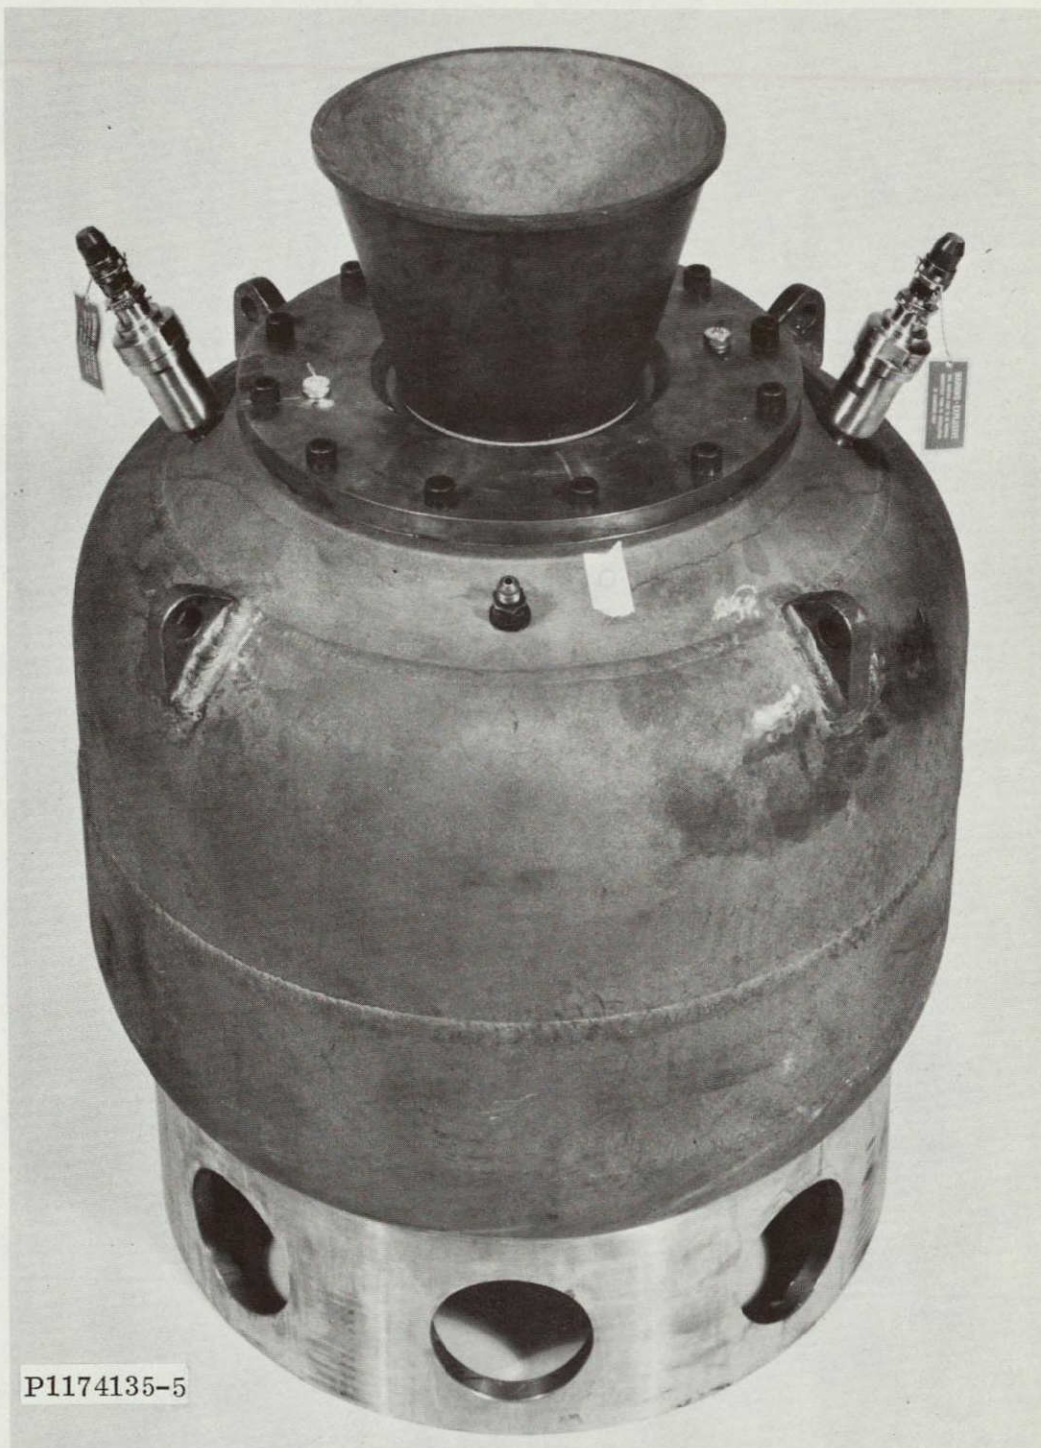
18-INCH-DIAMETER TEST MOTOR ASSEMBLY
